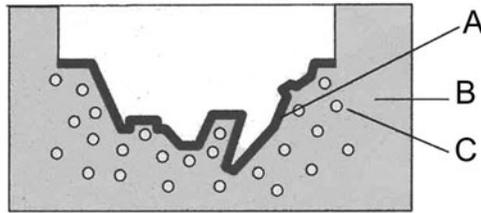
Moulding for slush skins: Nickel shell A, mould structure B, thermostatisation mould C.
